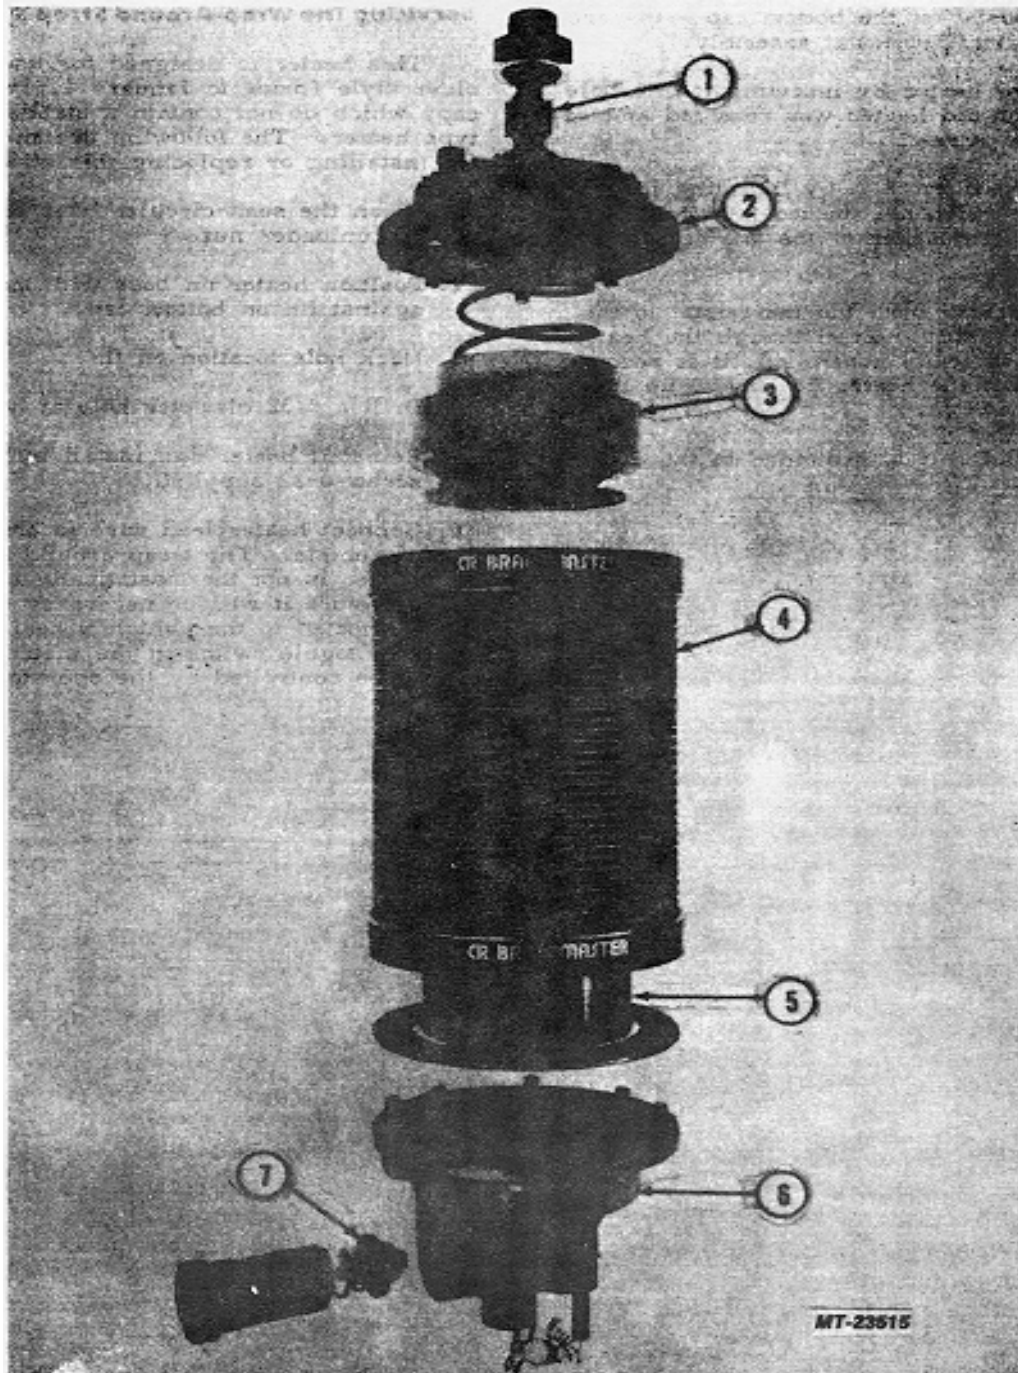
Exploded View of CR Brakemaster Heat Exchanger
